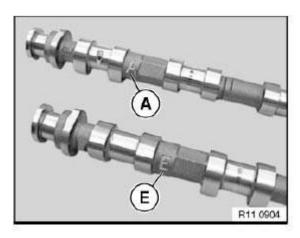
Identifying Exhaust Camshaft And Intake Camshafts Courtesy of BMW OF NORTH AMERICA, INC.
